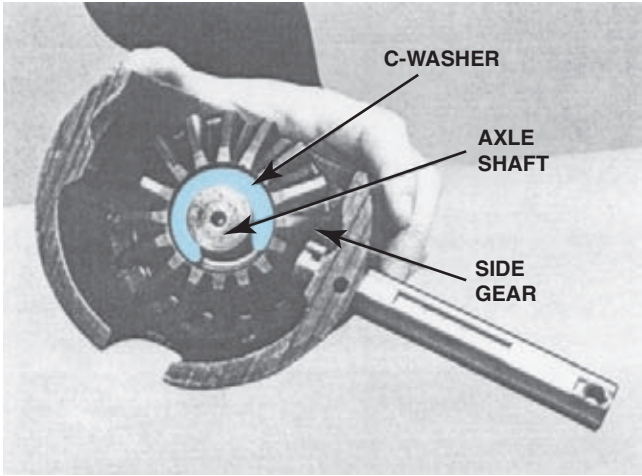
When the C-lock is in the axle groove and the axle is pulled back outward, the C-lock becomes locked in place in the side gear. (Courtesy of Ford Motor Company)
